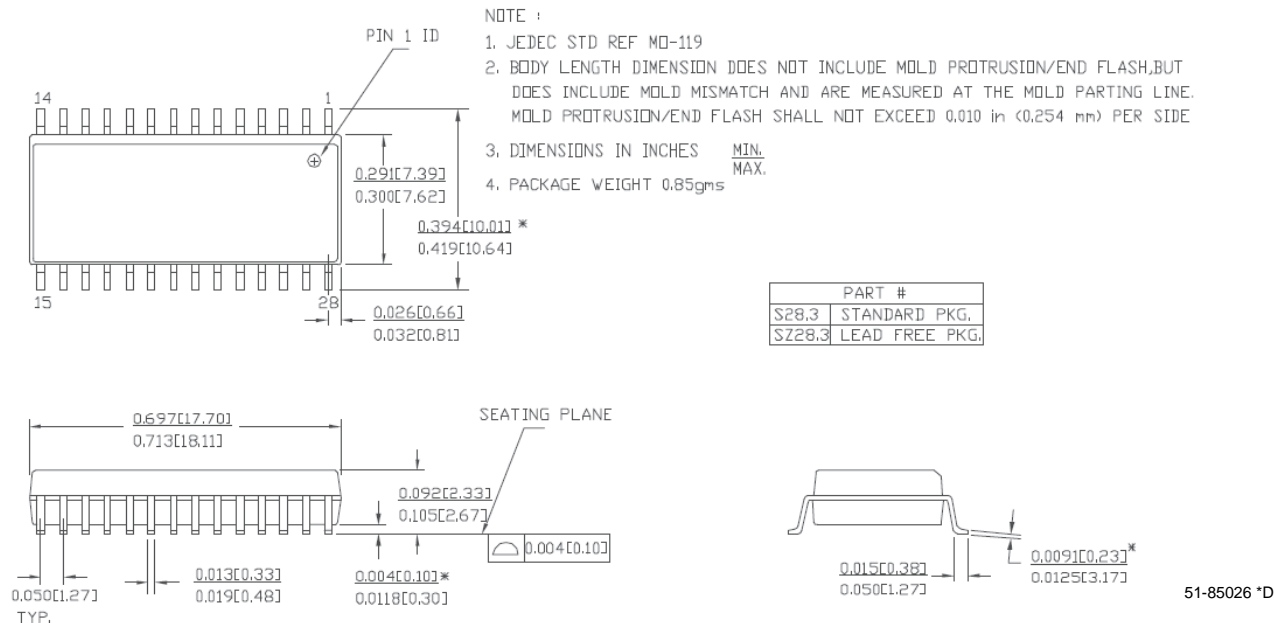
28-Lead (300-Mil) Molded SOIC
